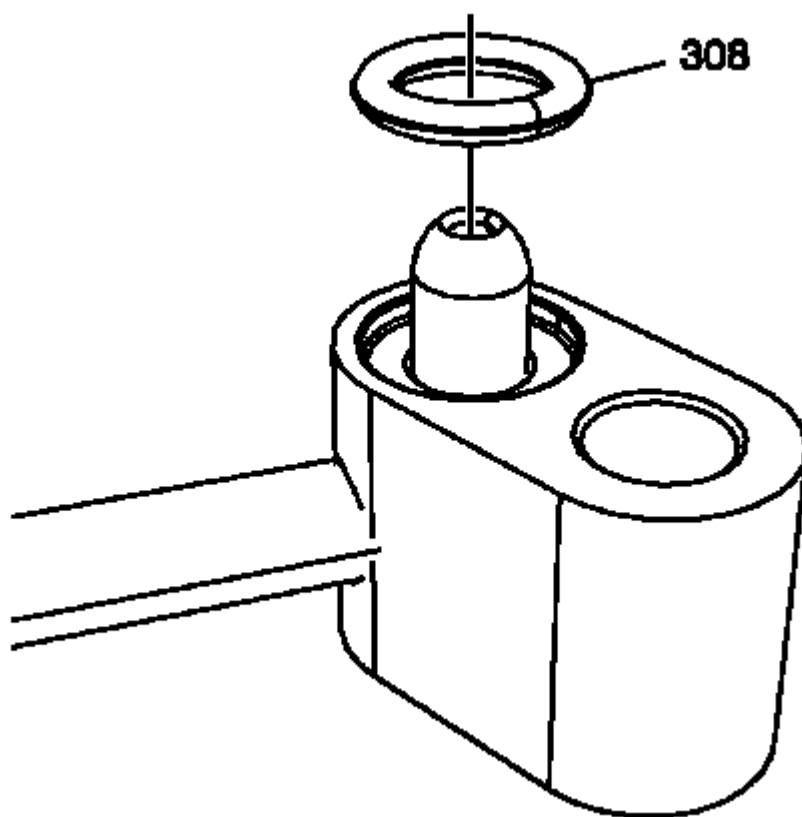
View Of Coolant Air Bleed Pipe Seal
